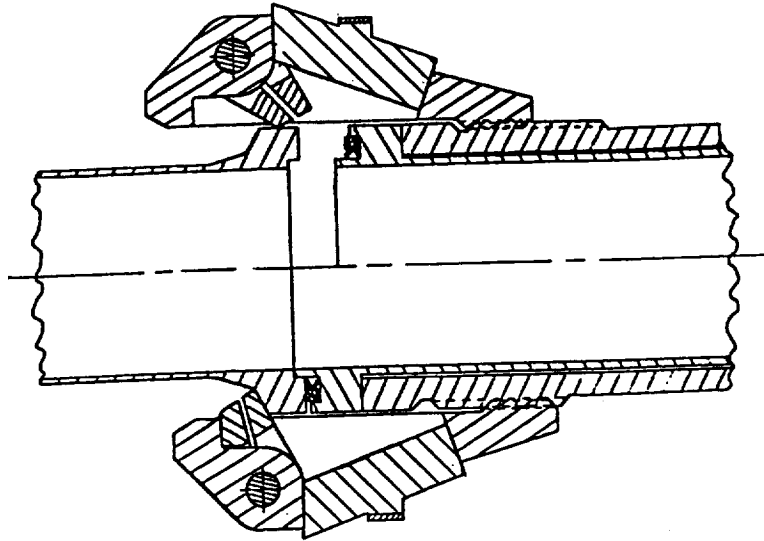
CONCEPT 5 - PRESET CARRIAGE SPRING-HOOK
